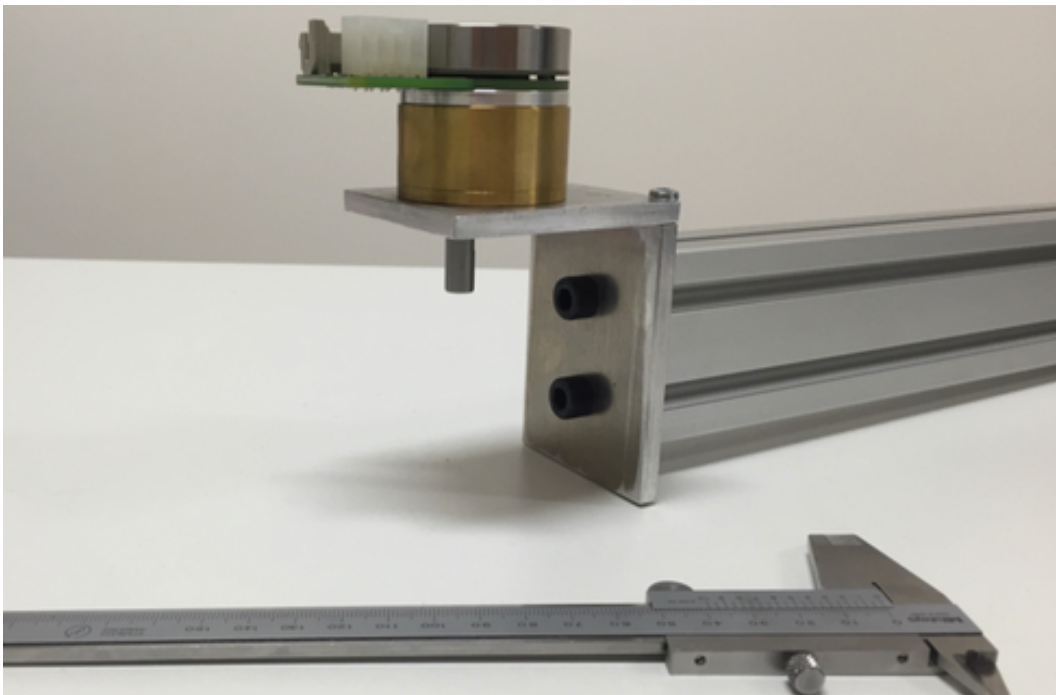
Joint 4* assembly, mounted on *link 3*, with motor installed.
